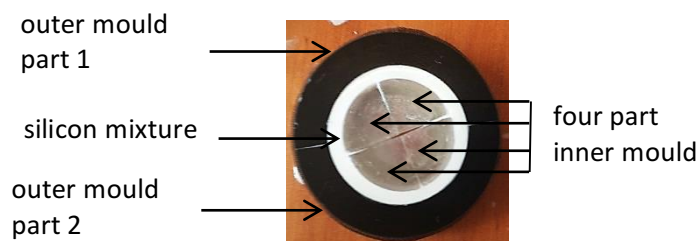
Moulds for making a holder for a circular surgical mitral valve assembled and filled with silicon; outer moulds (Object30 3D (Stratasys Ltd.)), inner moulds (Form1+ (Formlabs Inc.)).
